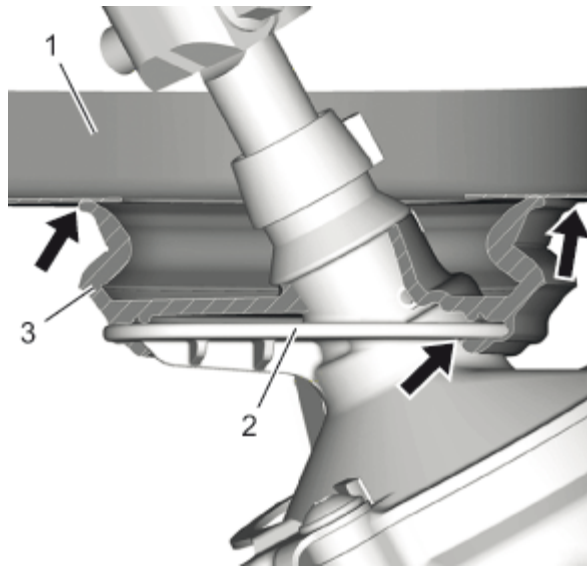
Steering Column Dash Outer Seal, Electric Belt Drive Rack And Pinion Steering Gear
